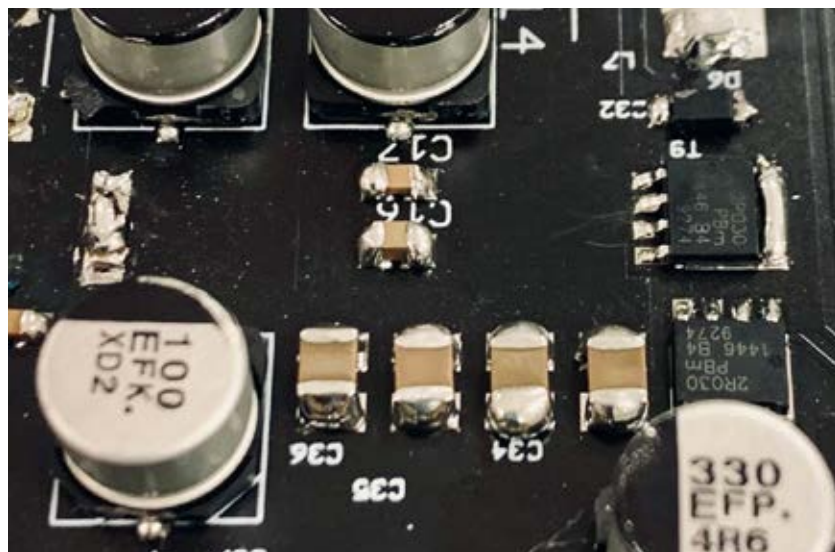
Examples of SMD wire and paste soldering employing Zephyrus 450 nm laser system, both on resist and metalcore PCB.
